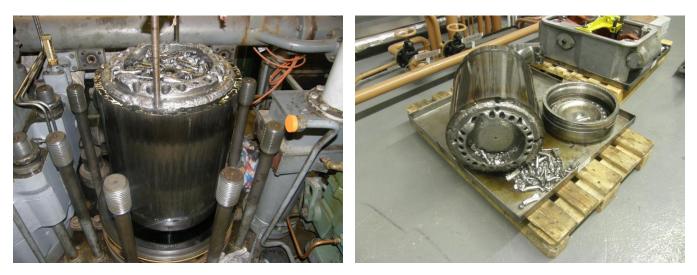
Damaged piston from 6th cylinder of DG4 after disassembling
